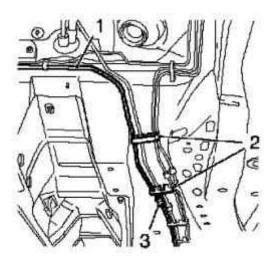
Disconnecting the front of the ventilation tube from the central ventilation tubes: 1 - Front ventilation tube, 2 - fuel line brackets, 3 - a quick-coupling
